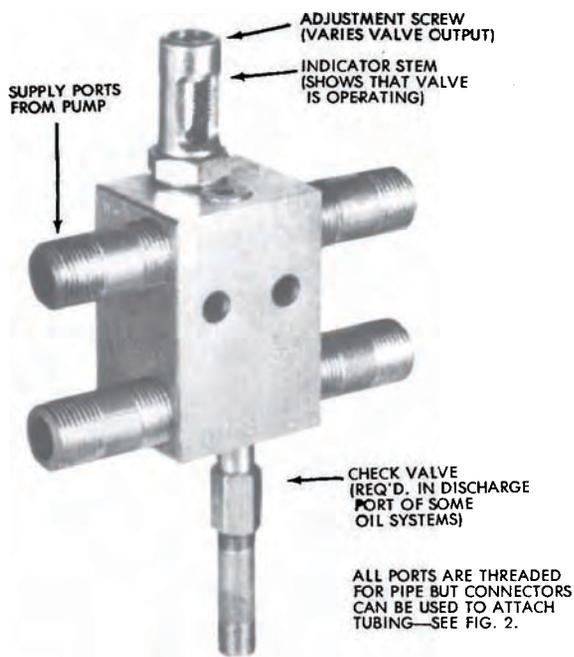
A typical 1 valve DM block. Each valve has a discharge port on the bottom. A 4 valve block would have four discharge ports.
